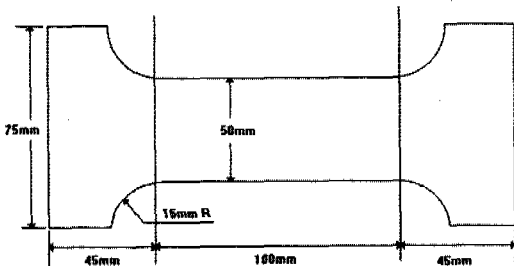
Specimen geometry for the measurement of tensile strength and fracture toughness.
